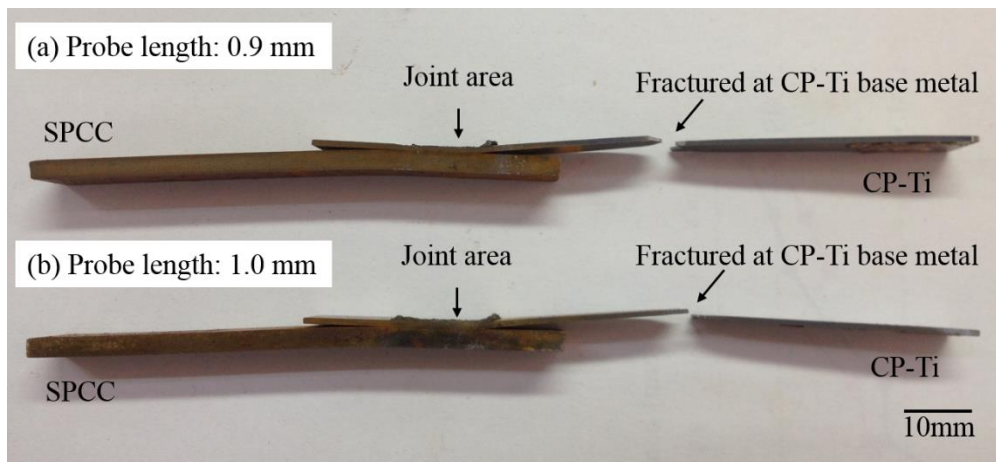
Side view appearances of the lap joints welded with different probe lengths, showing the fracture location after shear tensile test.
